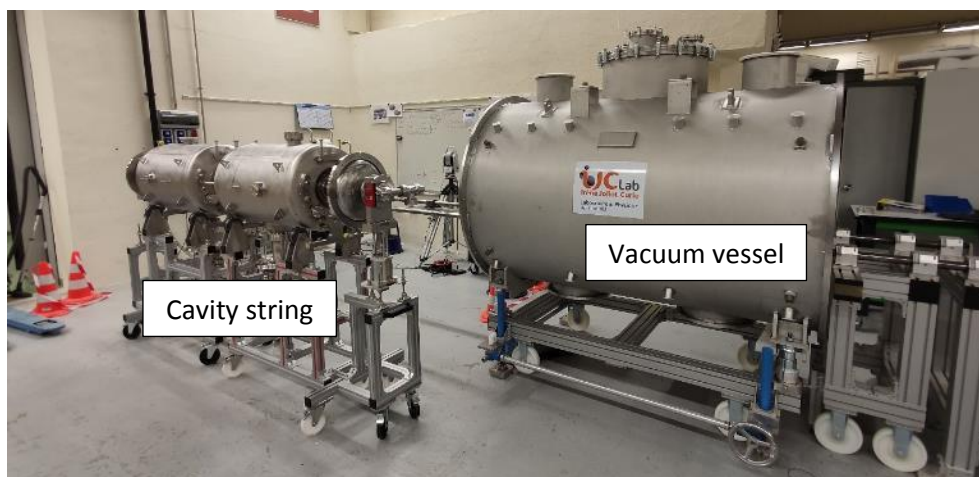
Picture of the cryomodule CM5 assembly: cavity string before its intergration into the vacuum vessel.
